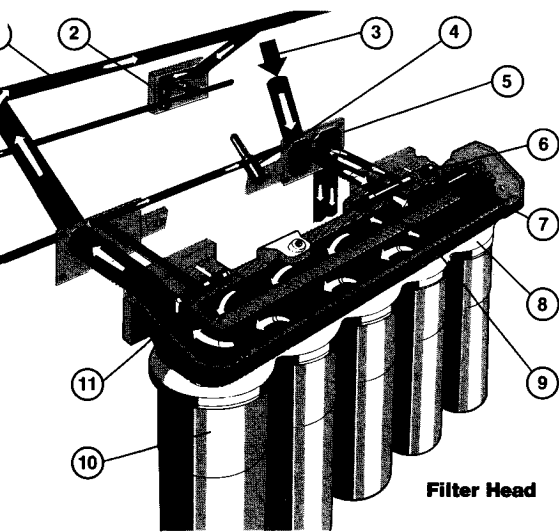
, (LWC-34). Front view optional lubricating oil flow — KT(A)-2300 Engine
